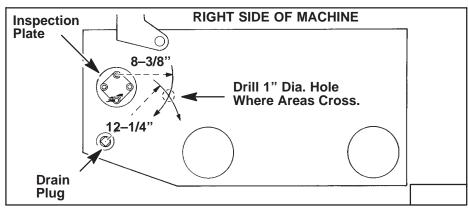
Locating Fuel Adjustment Hole (Petter)
